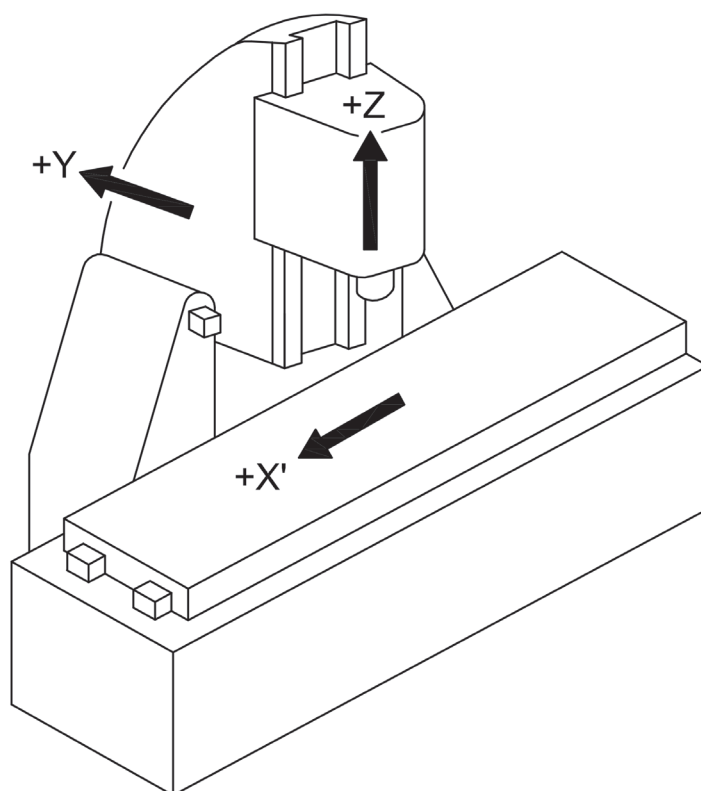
Example of a single column bed-type milling machine with vertical spindle
